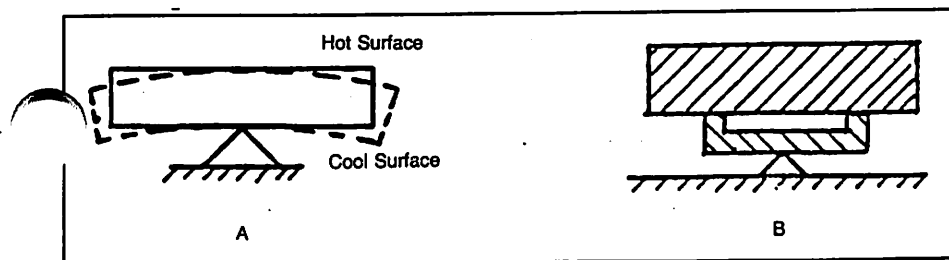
Sketch A shows how a thrust pad that is flat when it is at rest (solid outline) will assume a crowned shape (dashed outline) when it is exposed to a hot oil film on its bearing surface. Sketch B shows one technique for compensating for this curvature: the pad support is designed to weaken the center of the pad, so that the pressure of the oil film against it will act to flatten the surface.
